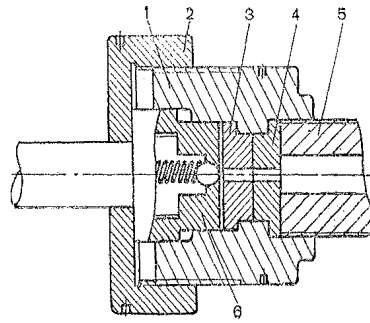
Adaptation to the device KI -562 for checking and adjustment of valve filters: 1 glass; 2 - a hard nut; 3, 4 - seals sleeves; 5 - fitting; 6 - filter housing.
